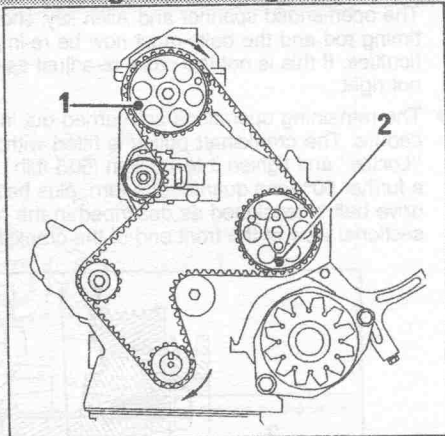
Details for the removal and installation of the timing belt. Insert the 8 mm bolts at positions (1) and (2).
